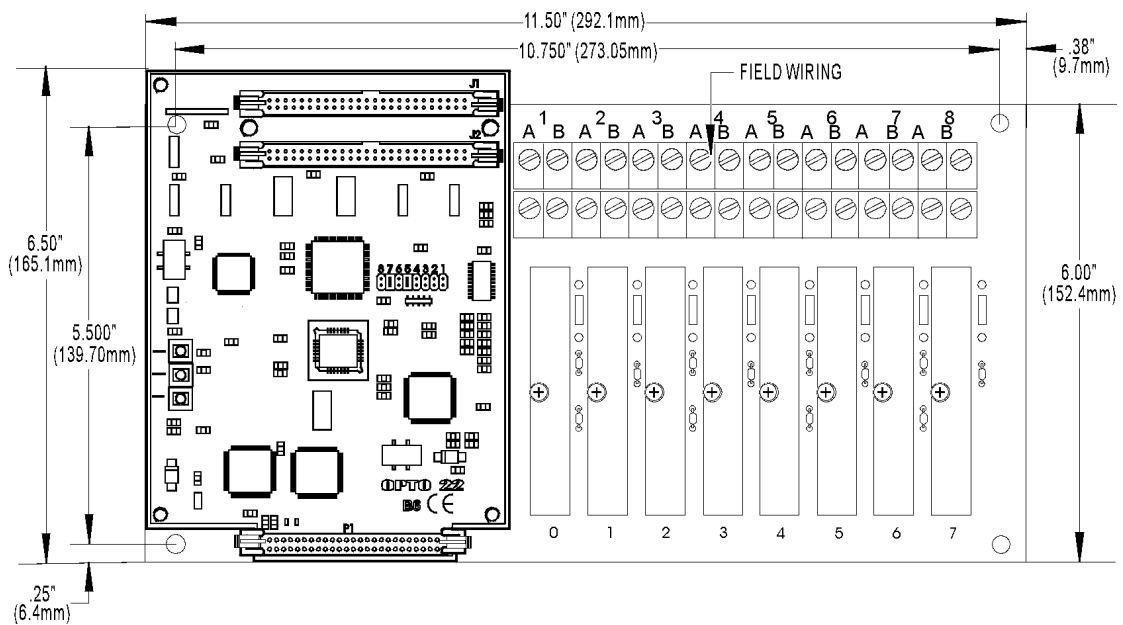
Mounting Dimensions of the PB8AH with a B6 Installed
